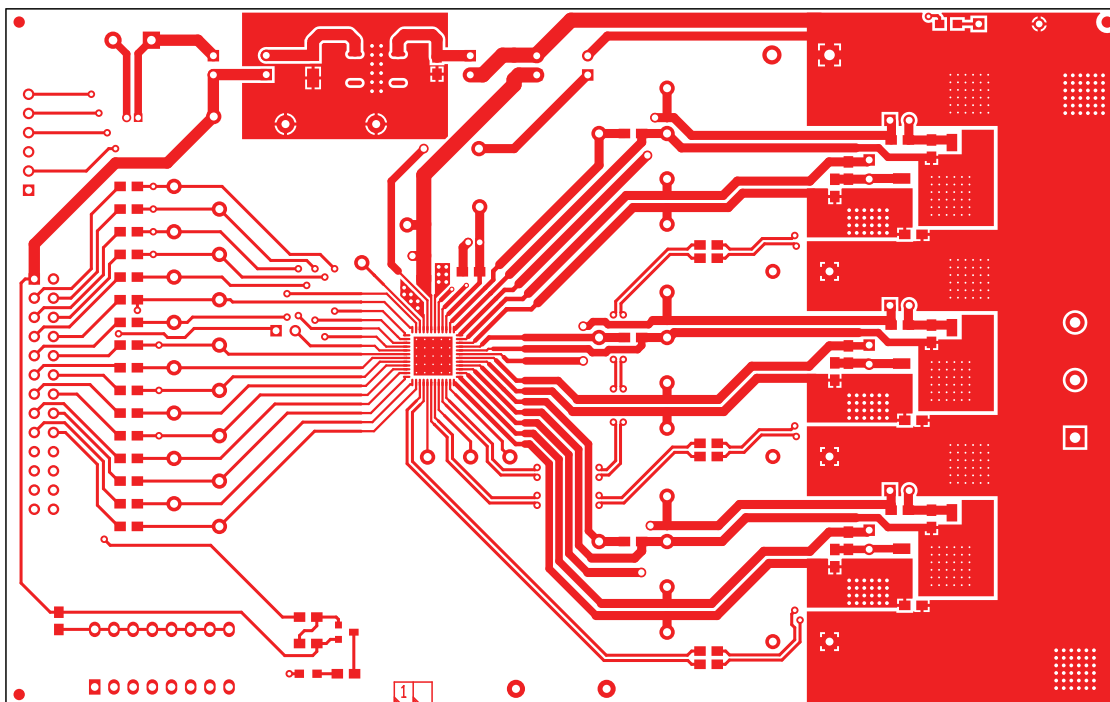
A89199KEV Evaluation Board PCB, Top Layer
